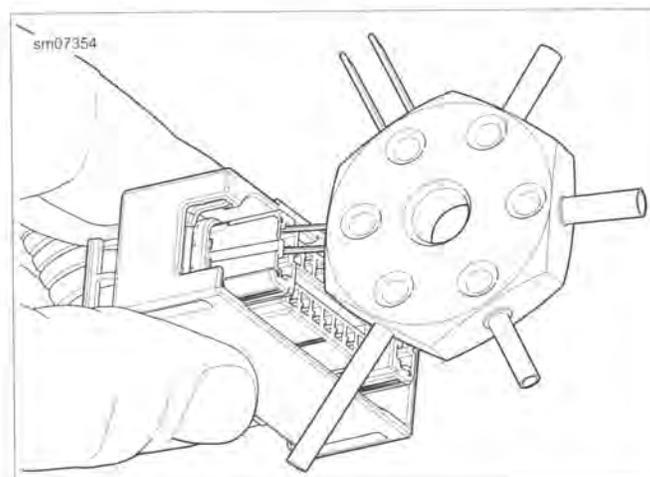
Removing Large Socket Terminals: Tyco MCP Connector
